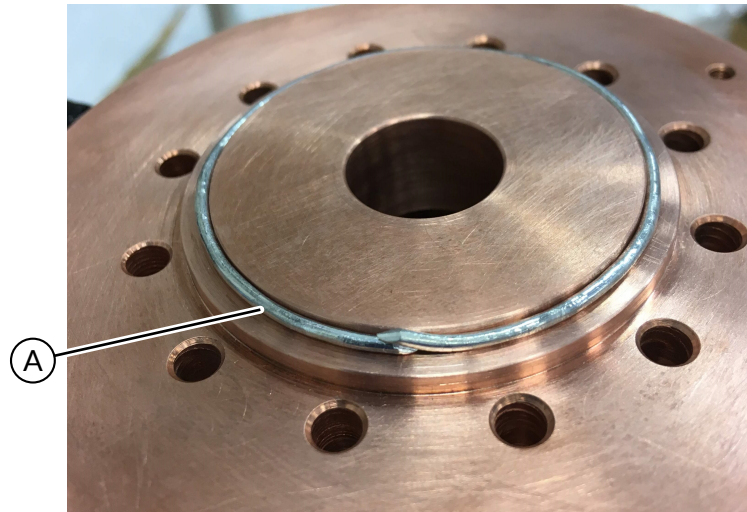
A photograph of one of the indium seals of the Breadboard Cooler. A is the indium wire.
